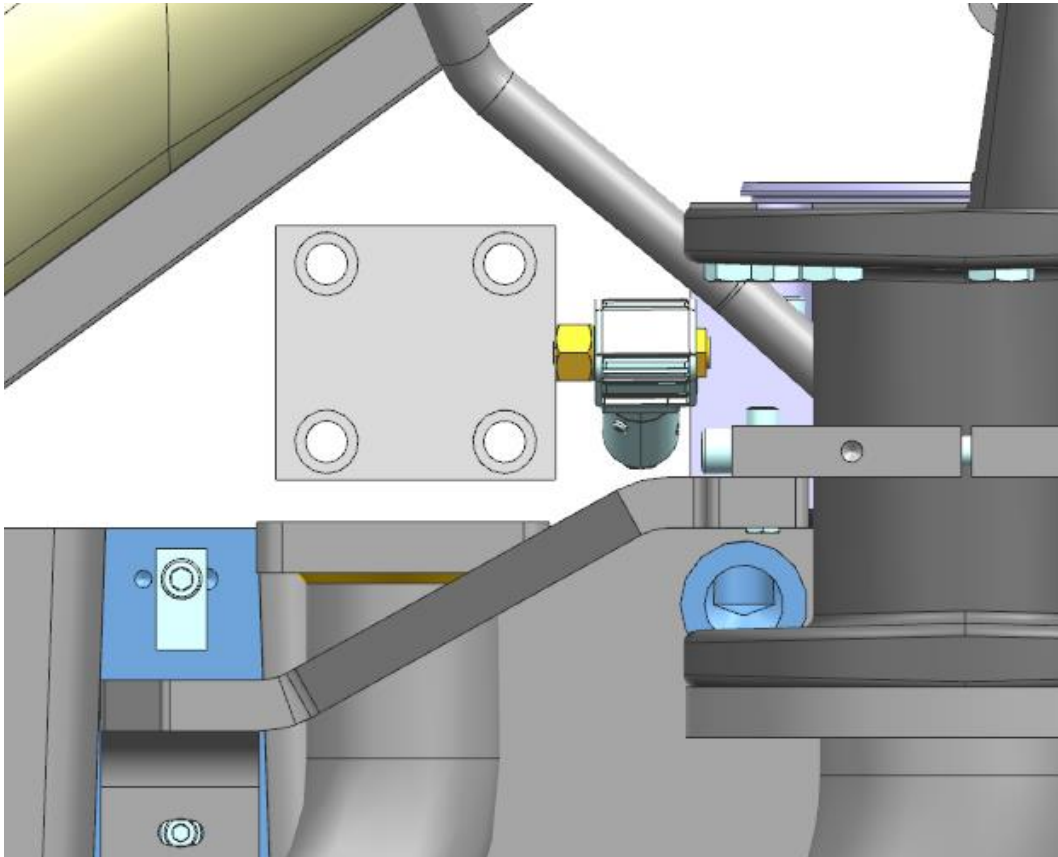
Placing VIC – solenoid and main oil inlet pipe.
